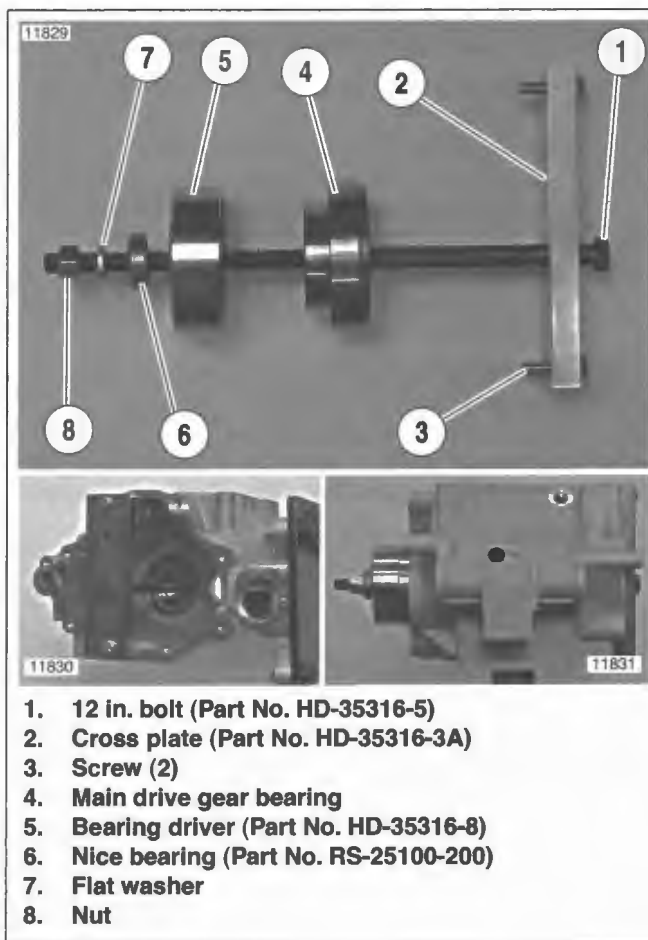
Installing Main Drive Gear Bearing—Typical
